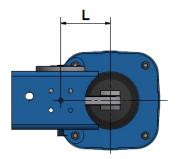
Dimensional drawing for Type R Actuators with VETEC console
